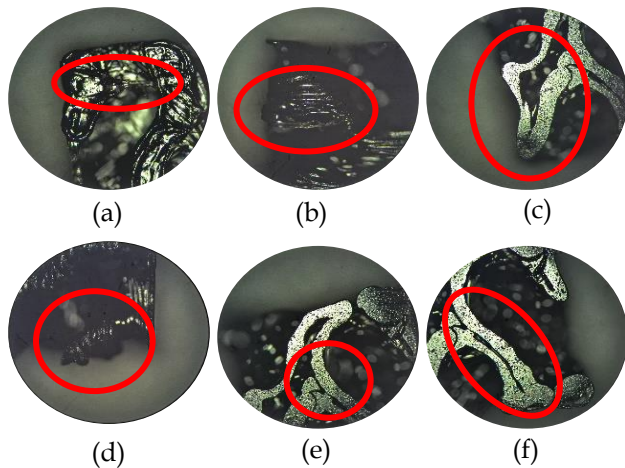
Test 2; P.S.-25 mm/s, R.S.- 40 mm/s; (a) String; (b) Layer shift; (c) Shape deformation; (d) Excessive material; (e) Voids; (f) Nonuniform layer width
